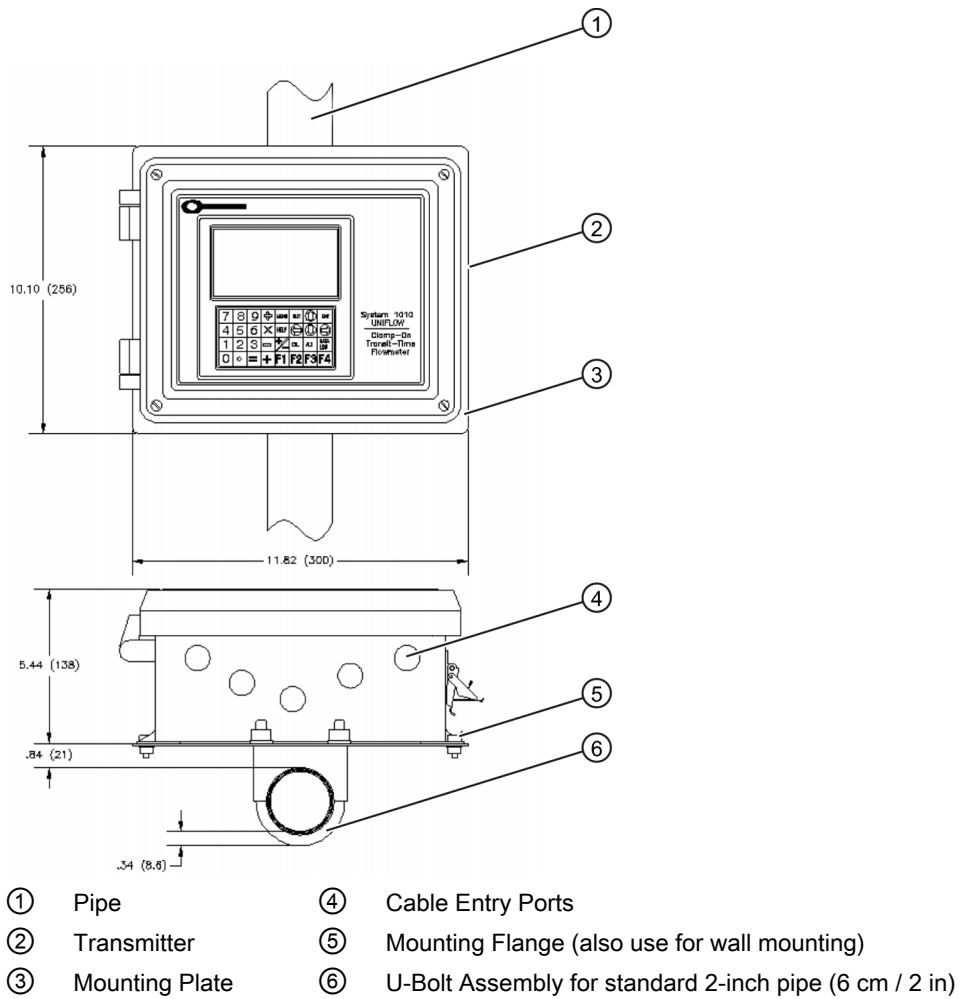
Pipe Mounting and Mounting Locations for Transmitter
